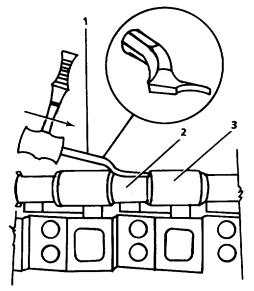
Water Transfer Tube Positioning for Removal.
